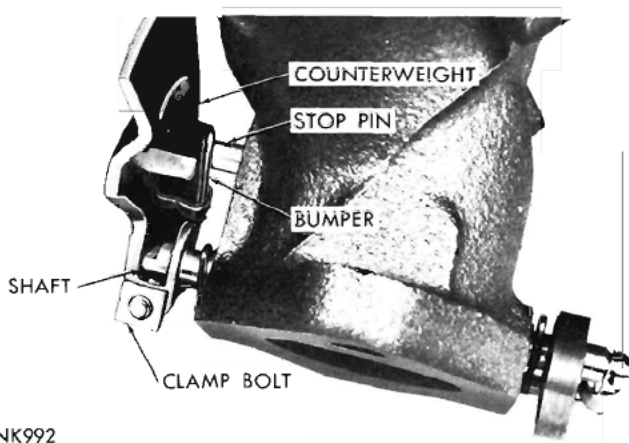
Installing Counterweight (318 Cu. In. Engine)
